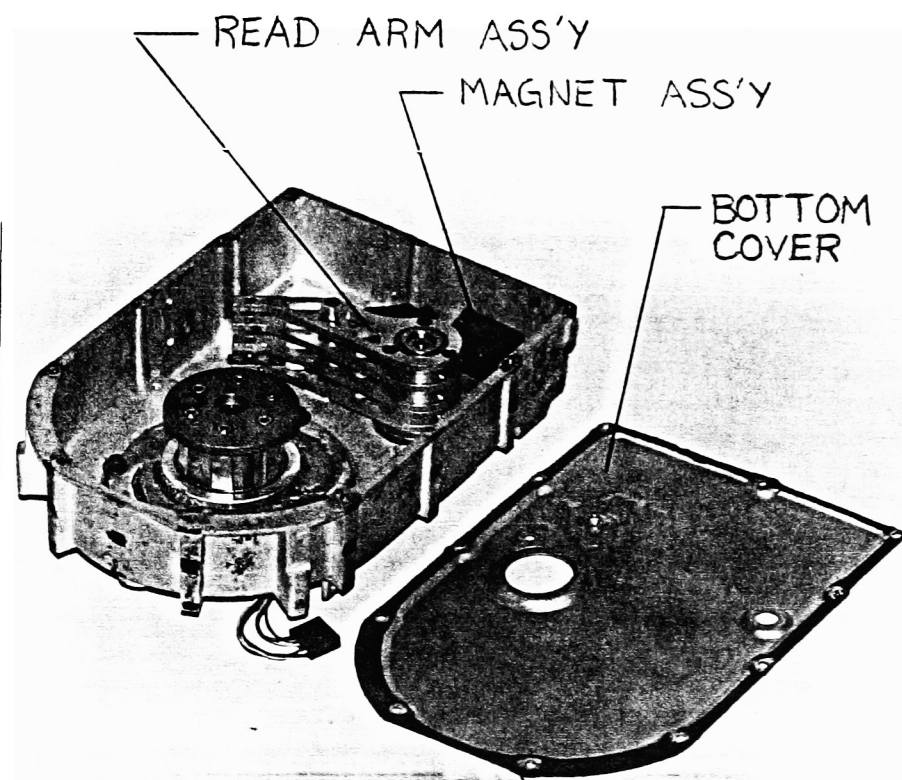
Bottom View of Disk Drive with Bottom Cover Removed
